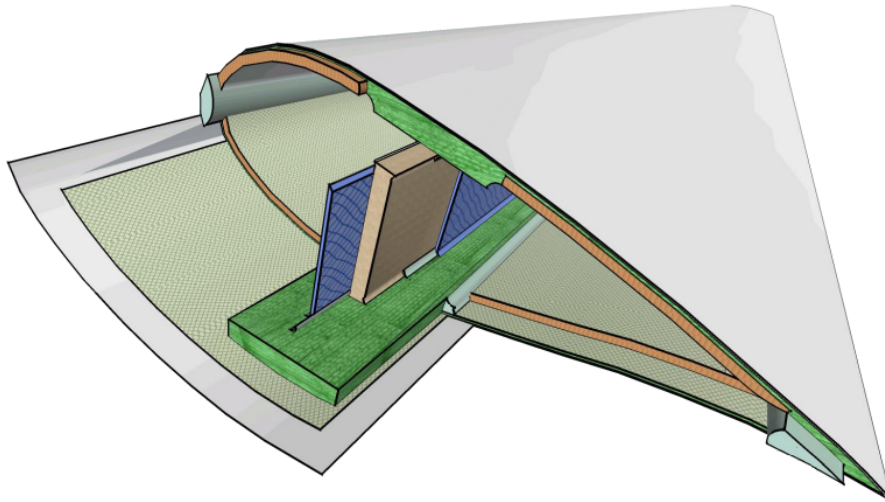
3-D blade cross section cut (Lectures of Design and Manufacturing of Wind Turbine Blades [3])
